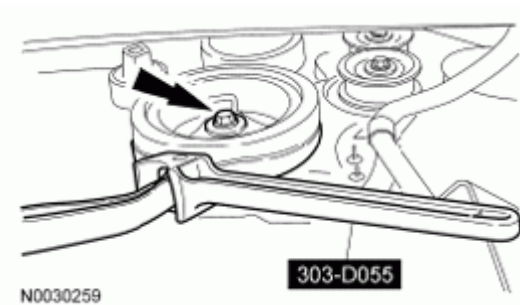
Holding Crankshaft Pulley Using Strap Wrench
